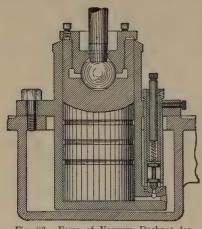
Form of Vacuum Dashpot for Closing Admission Valves
